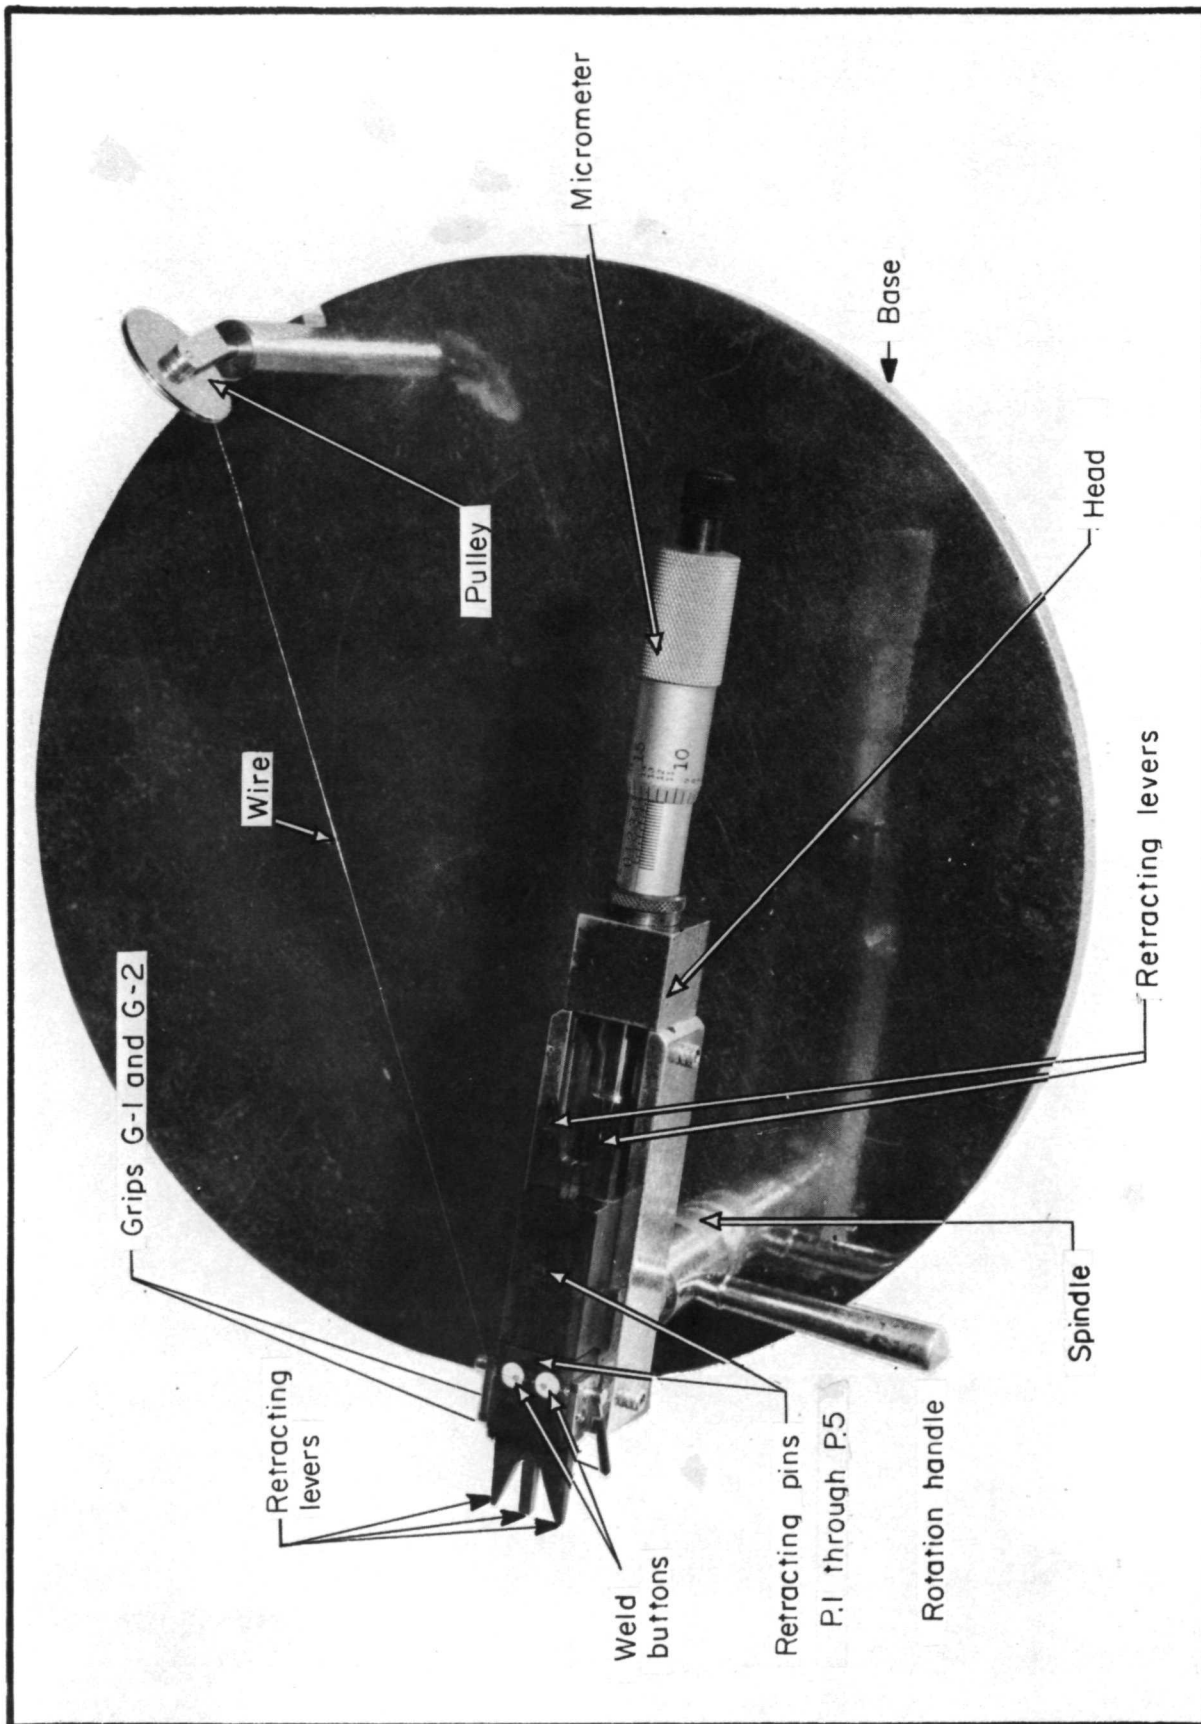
GAGE WINDING FIXTURE ASSEMBLY
